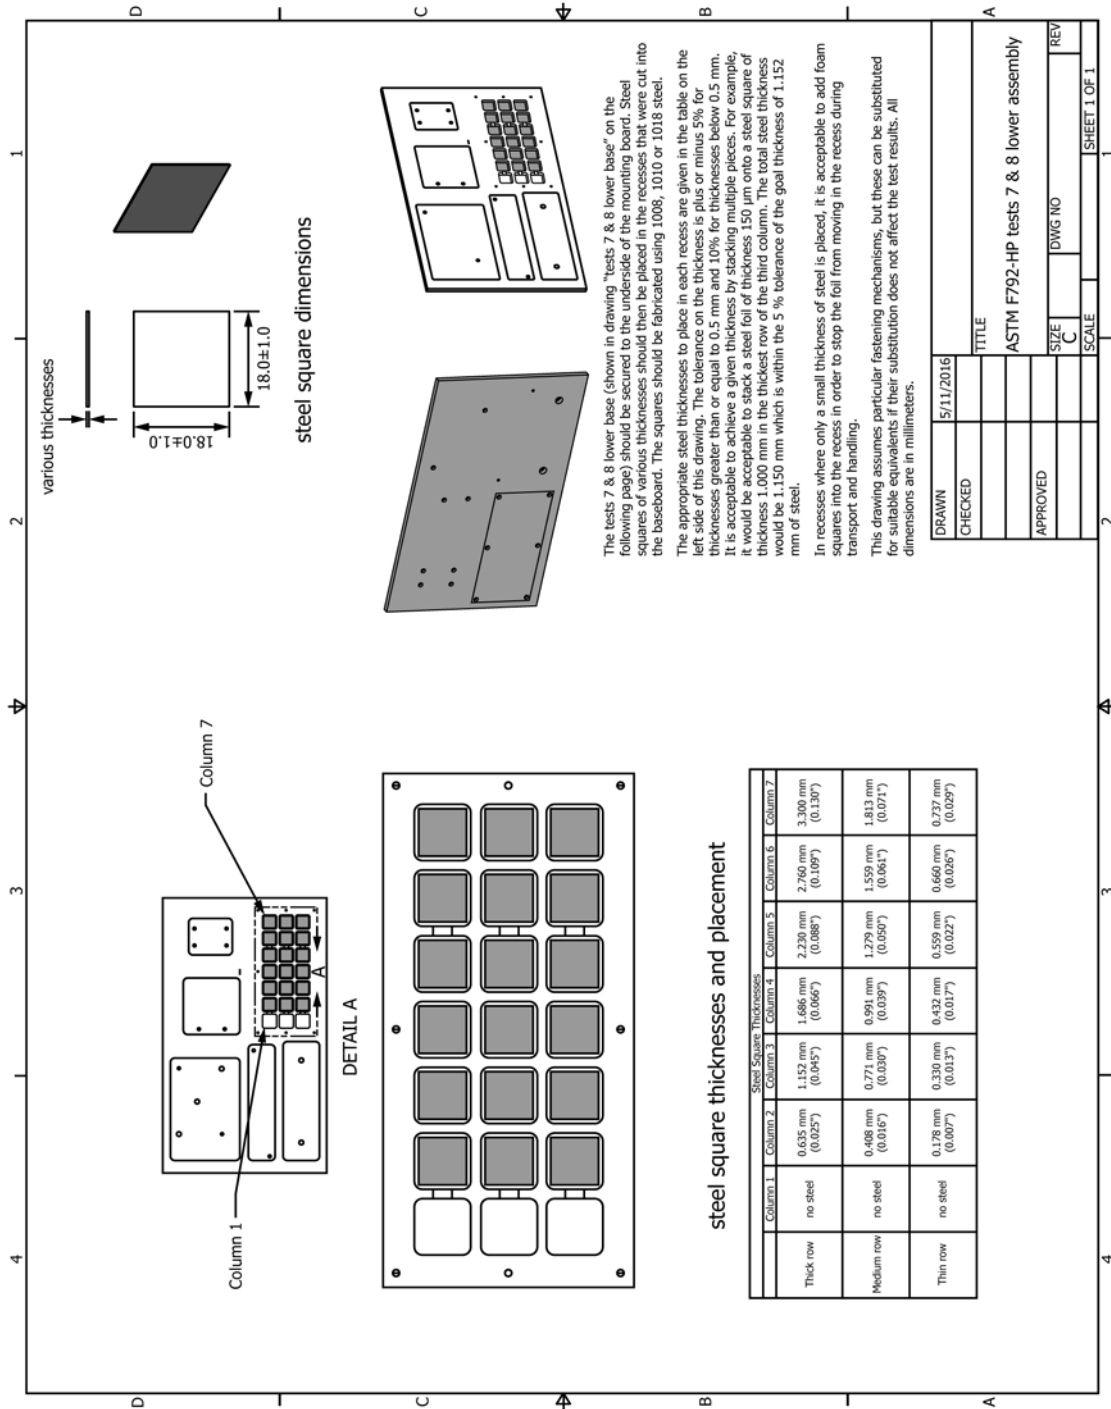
Practice F792 – HP Mechanical Drawing
